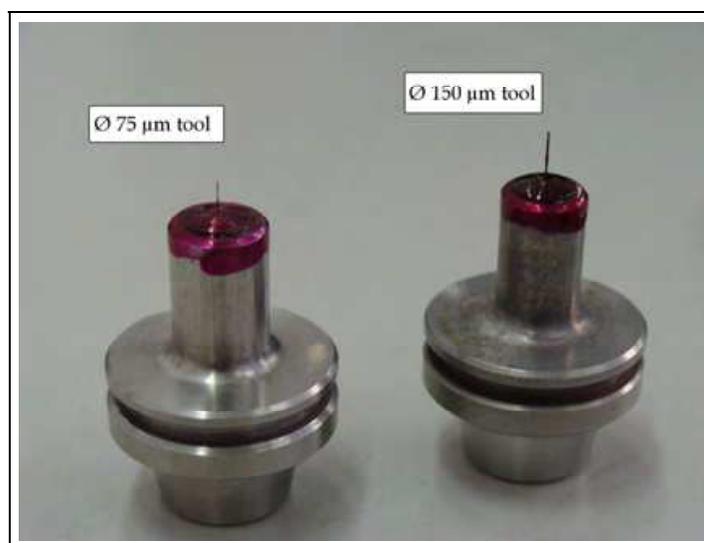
Tools ready for manufacturing. The left tool has a diameter of 75 μm and the right tool a diameter of 150 μm , both with Lacomit layer.
